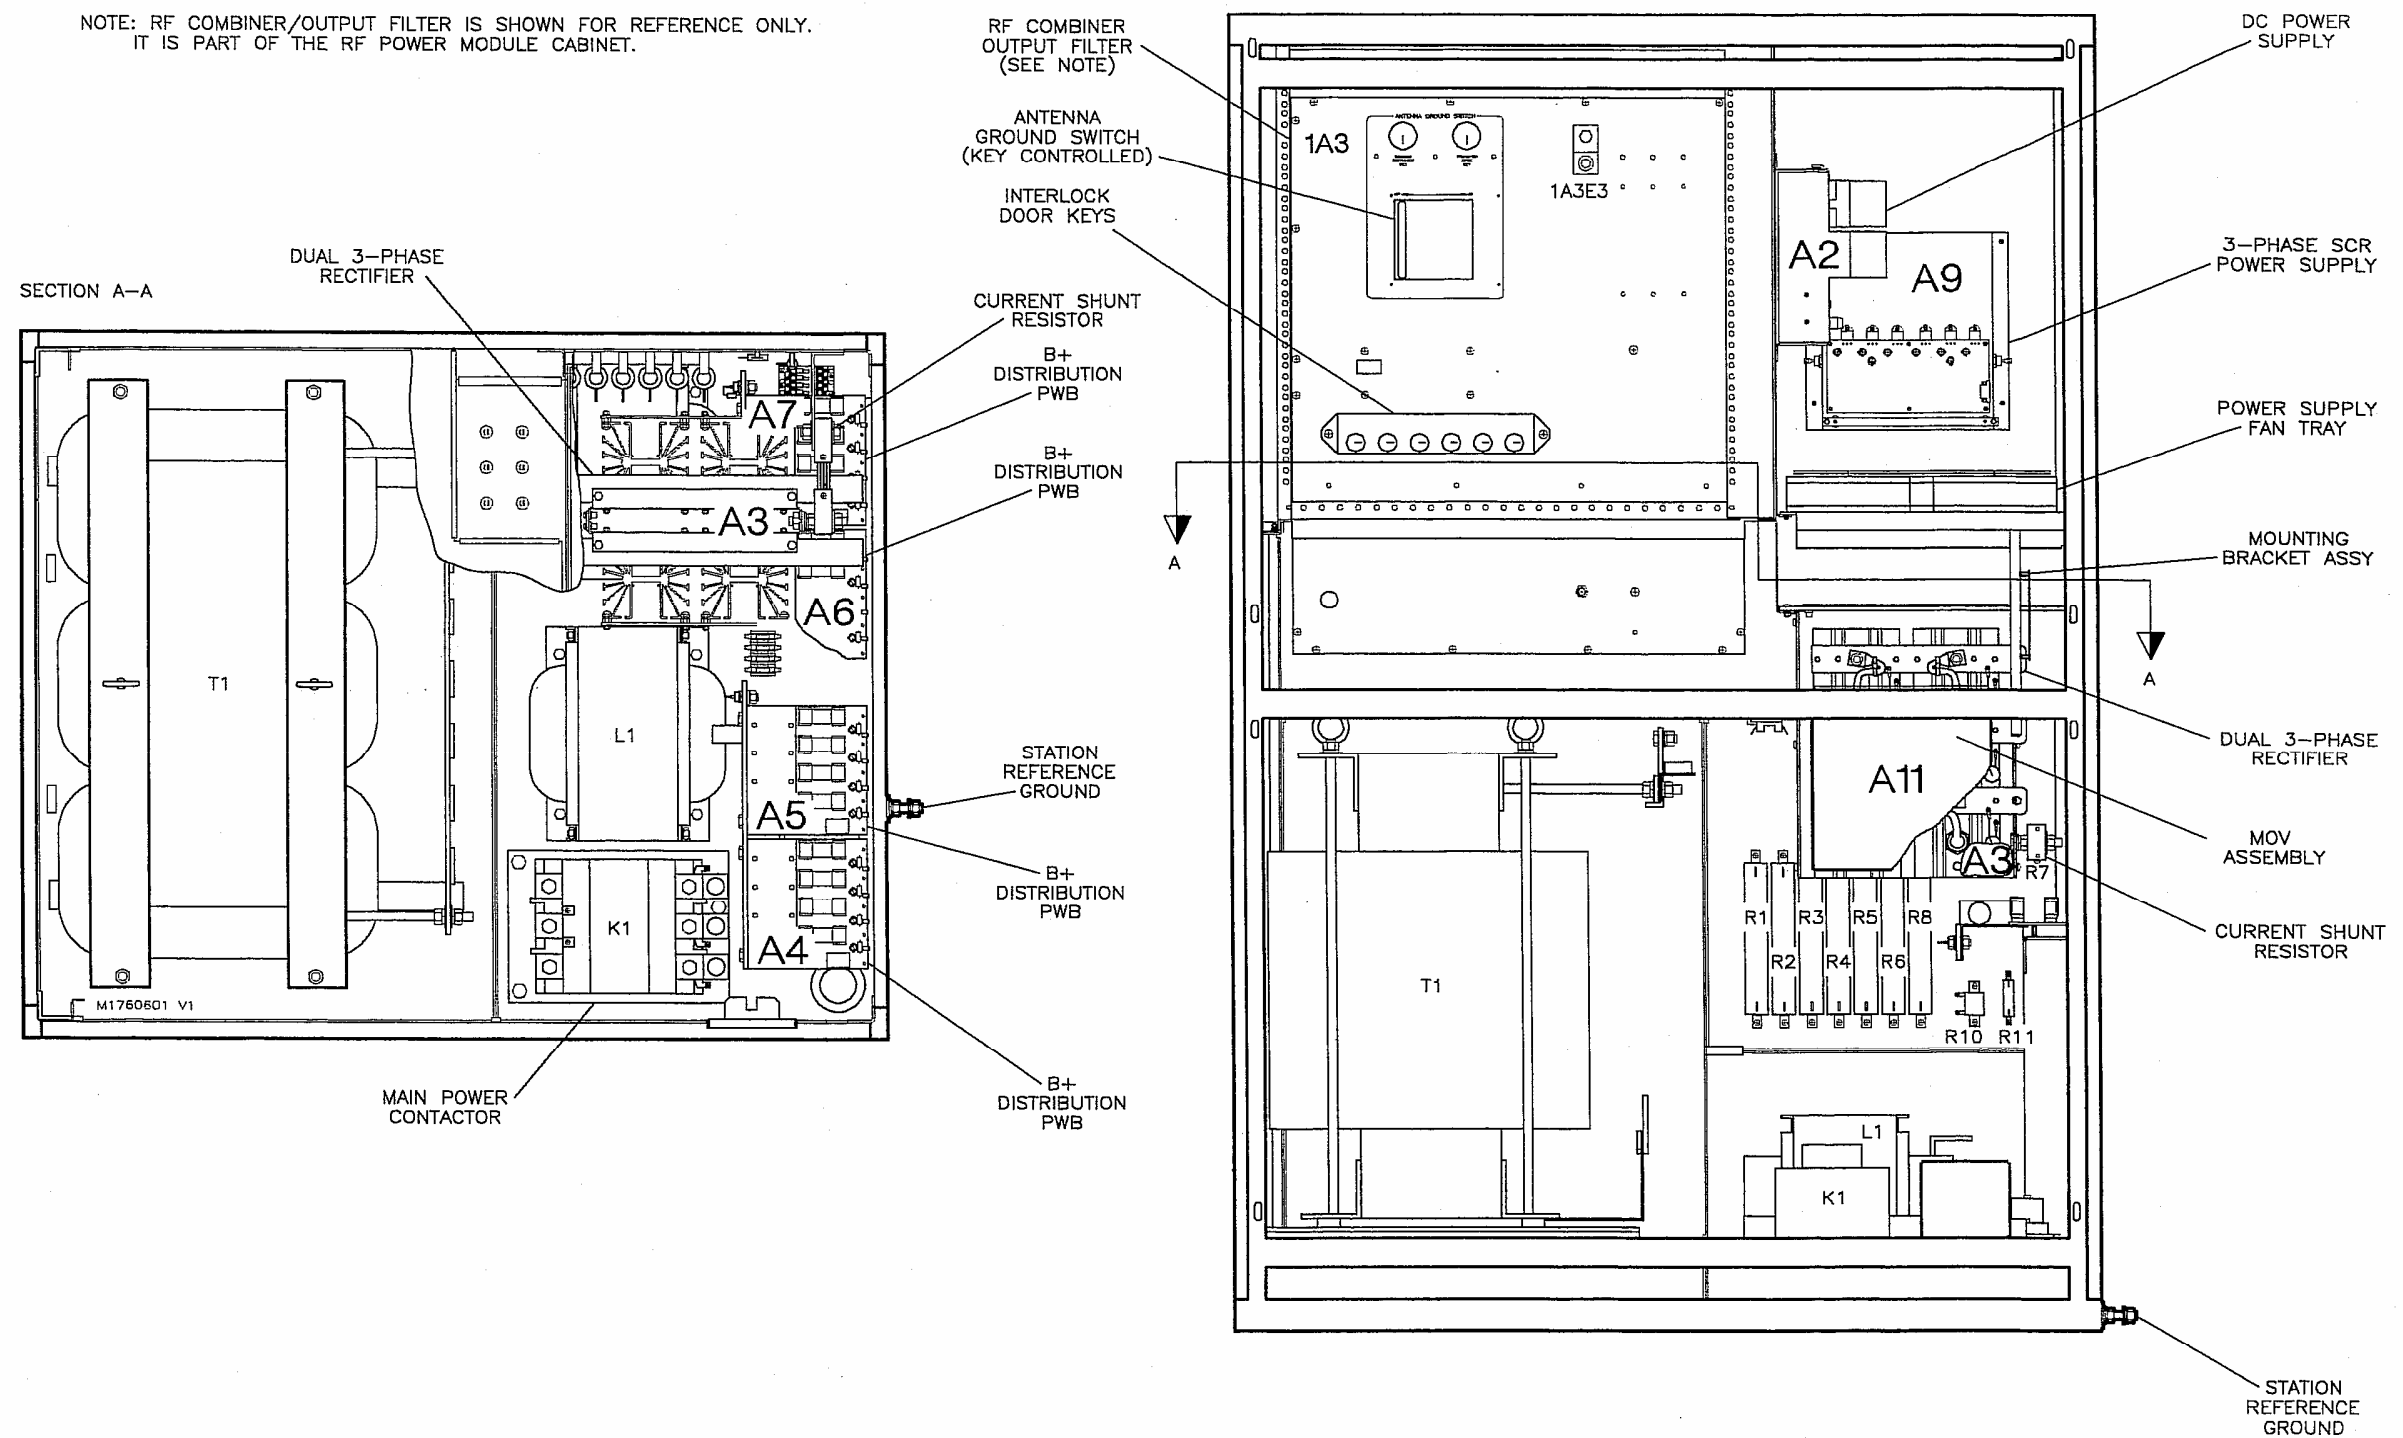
Assembly Detail - NAR222B AC/DC Power Supply Cabinet (Side/Cross Section)
